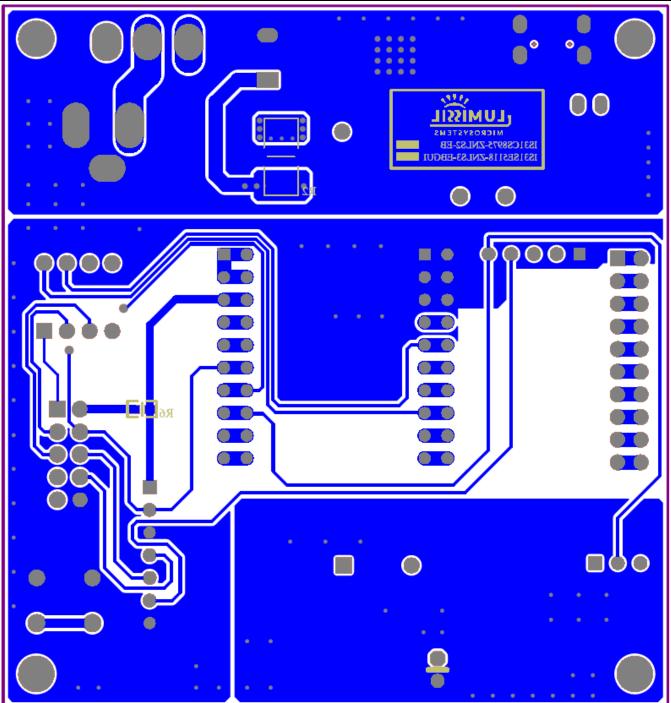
IS31CS8975 Evaluation Board PCB Layout - Bottom Layer
